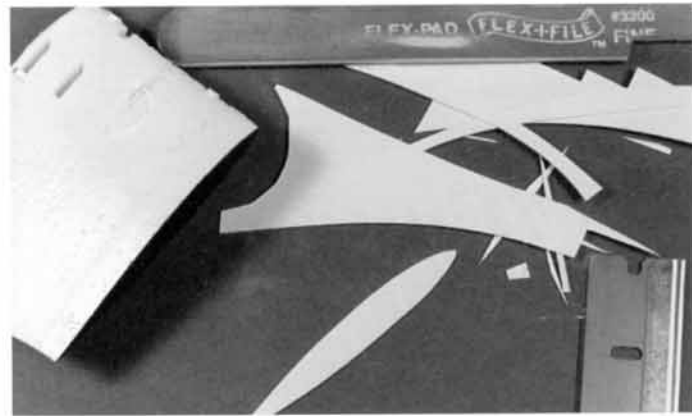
Rough-cut the shape, make tangential cuts along the edge of the line using a single-edge razor blade, and then smooth the surface with a Flex-I-File sanding stick.
